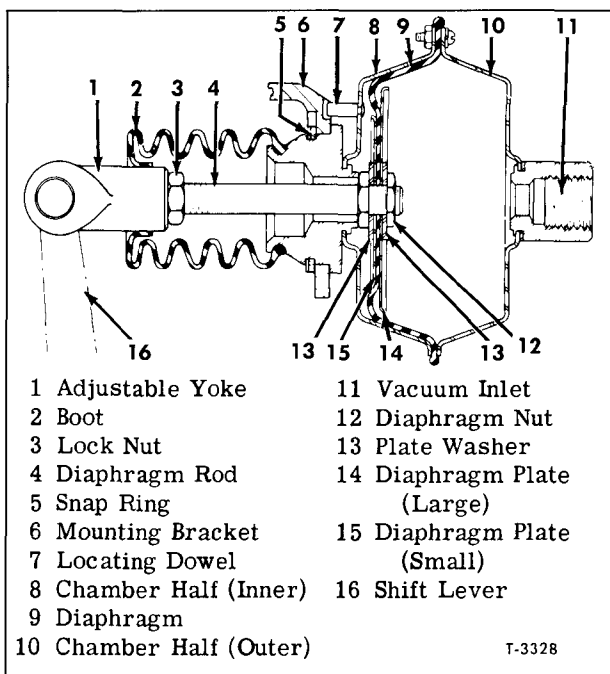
Inter-Axle Vacuum Shift Chamber (Eaton)
